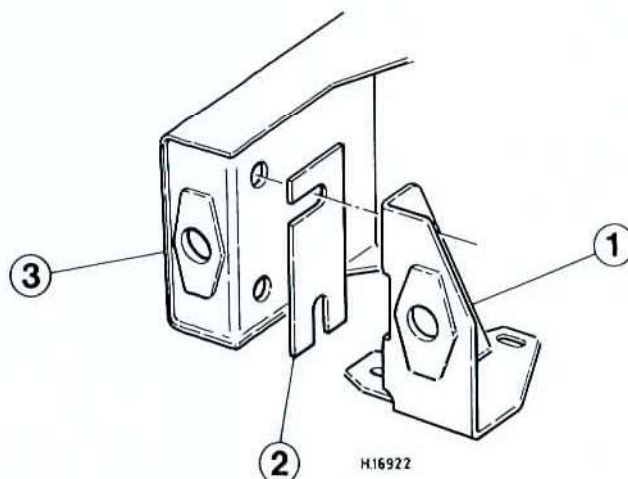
Radius arm outer bracket spacer (Sec 14)
